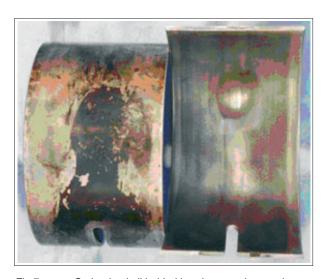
Carbonised oil behind bearing, causing overloading. Do not refit.
